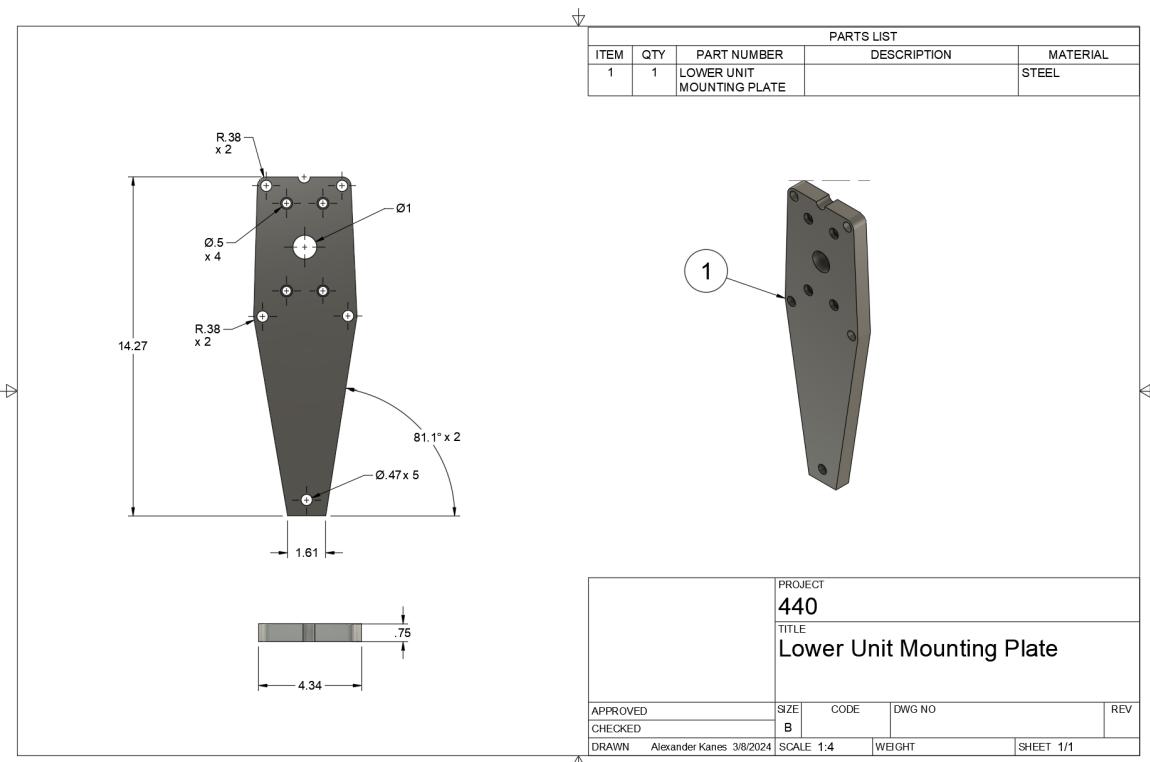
2D Drawing of Lower Unit Mounting Plate.
